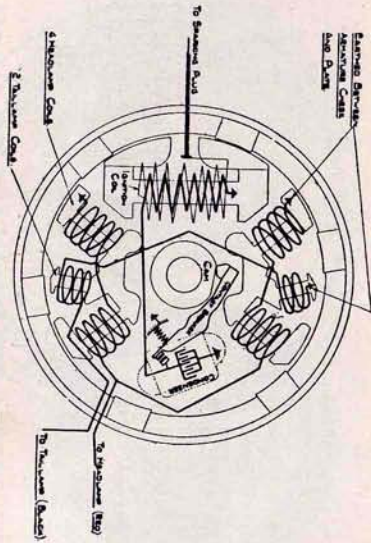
ARMATURE PLATE IGNITION AND LIGHTING WIRING DIAGRAM FOR SIX-POLE MAGNETO.
